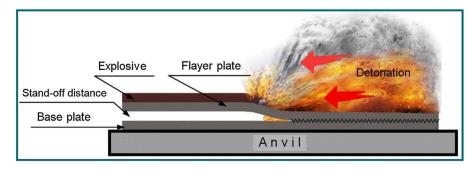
The schematic view of parallel set up for explosive welding process.
